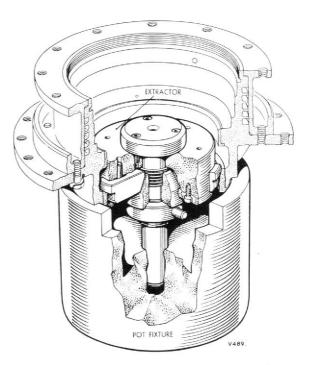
Pressing labyrinth bush out of rear bearing housing with extractor T.78038 and pot fixture T.78039.
